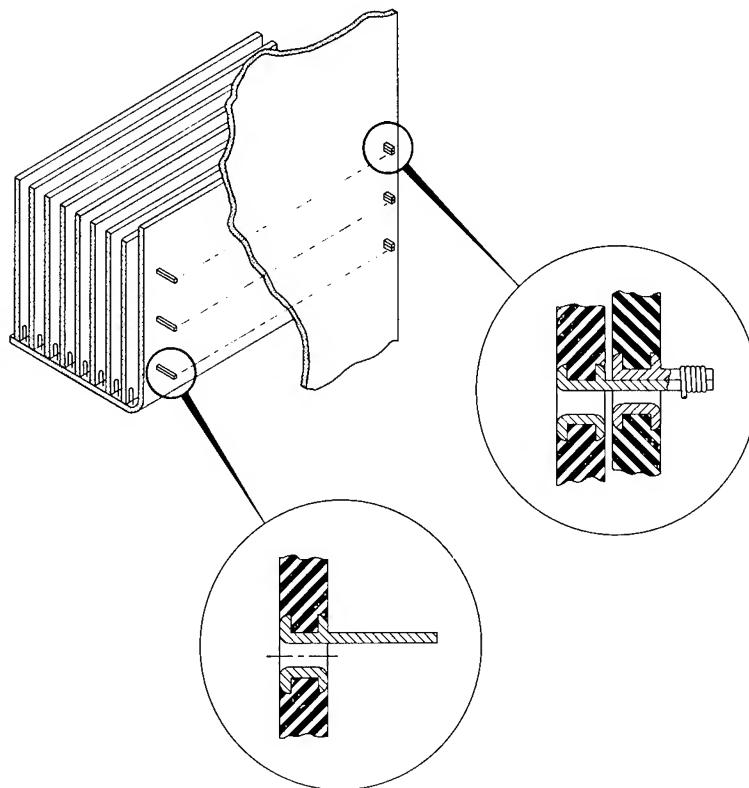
Split-pin wire-wrapped printed circuit assembly.
